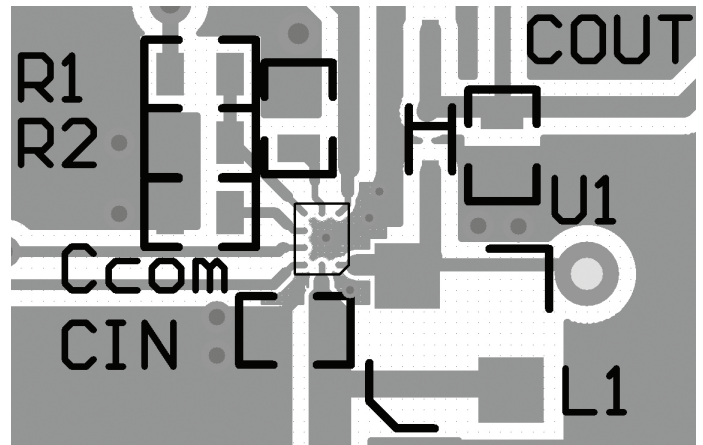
AAT1401 Evaluation Board Top Side Layout (detail).
